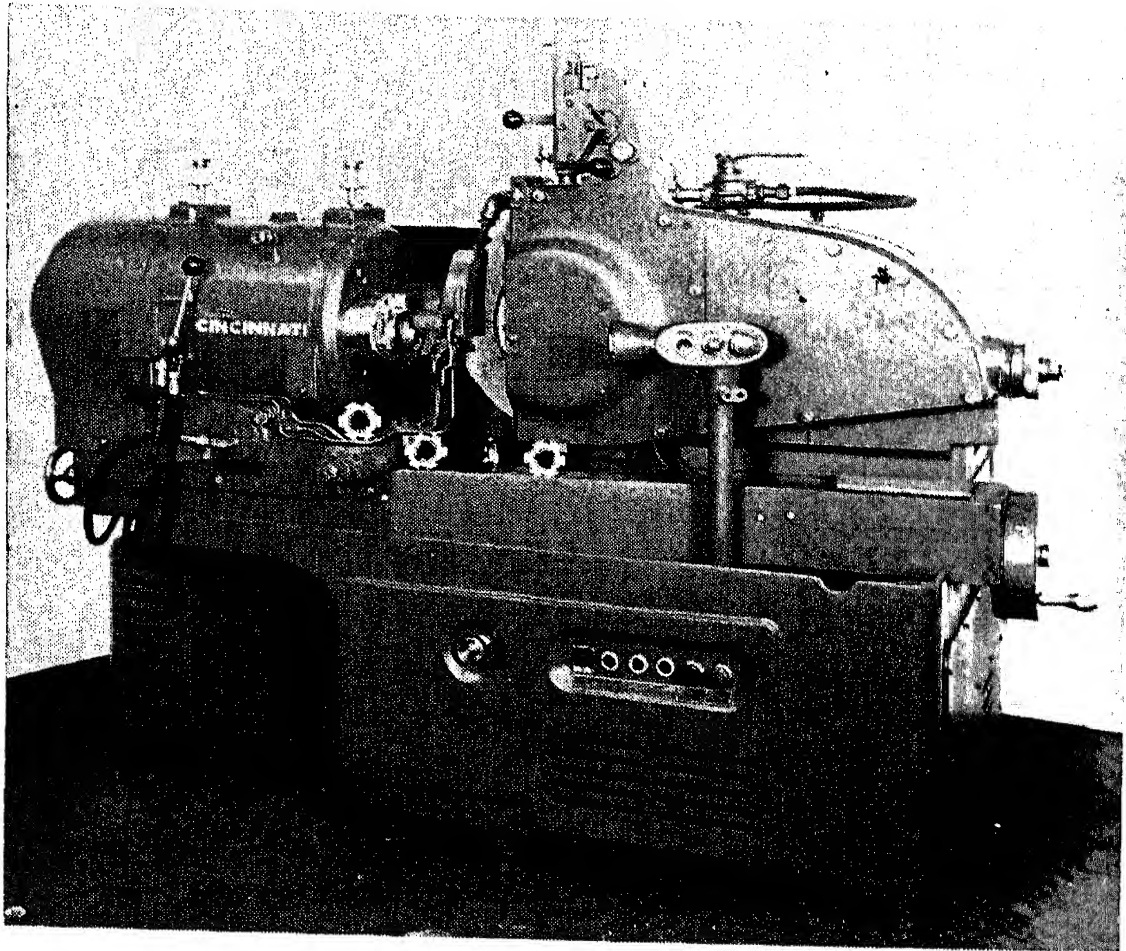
A 2 spindle chucking grinder. (Courtesy Cincinnati Grinders, Inc.)
